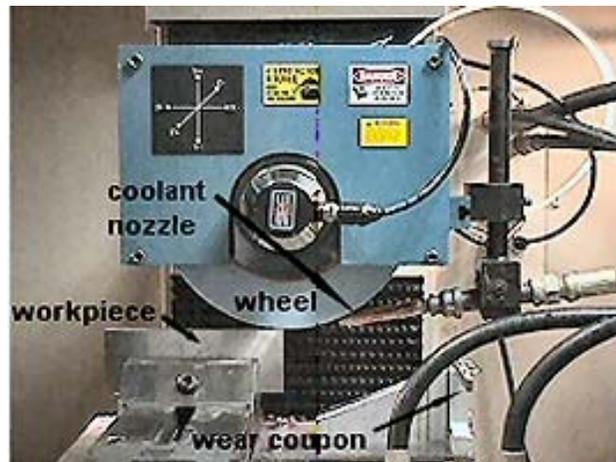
A typical setup for measuring grinding wheel performance on the K.O. Lee creep-feed surface grinder.
